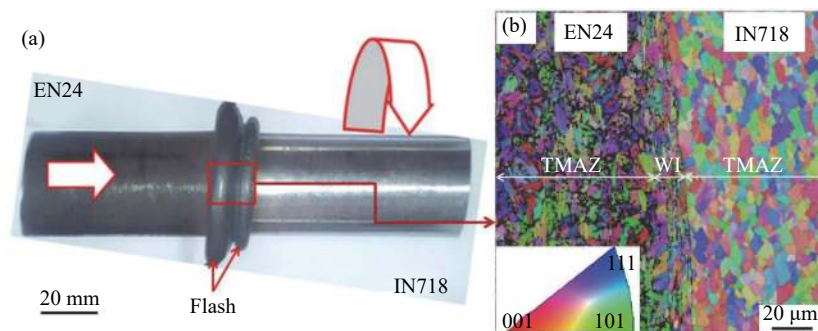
Friction welded sample (a) and inverse pole figure of friction welded joint (b).
